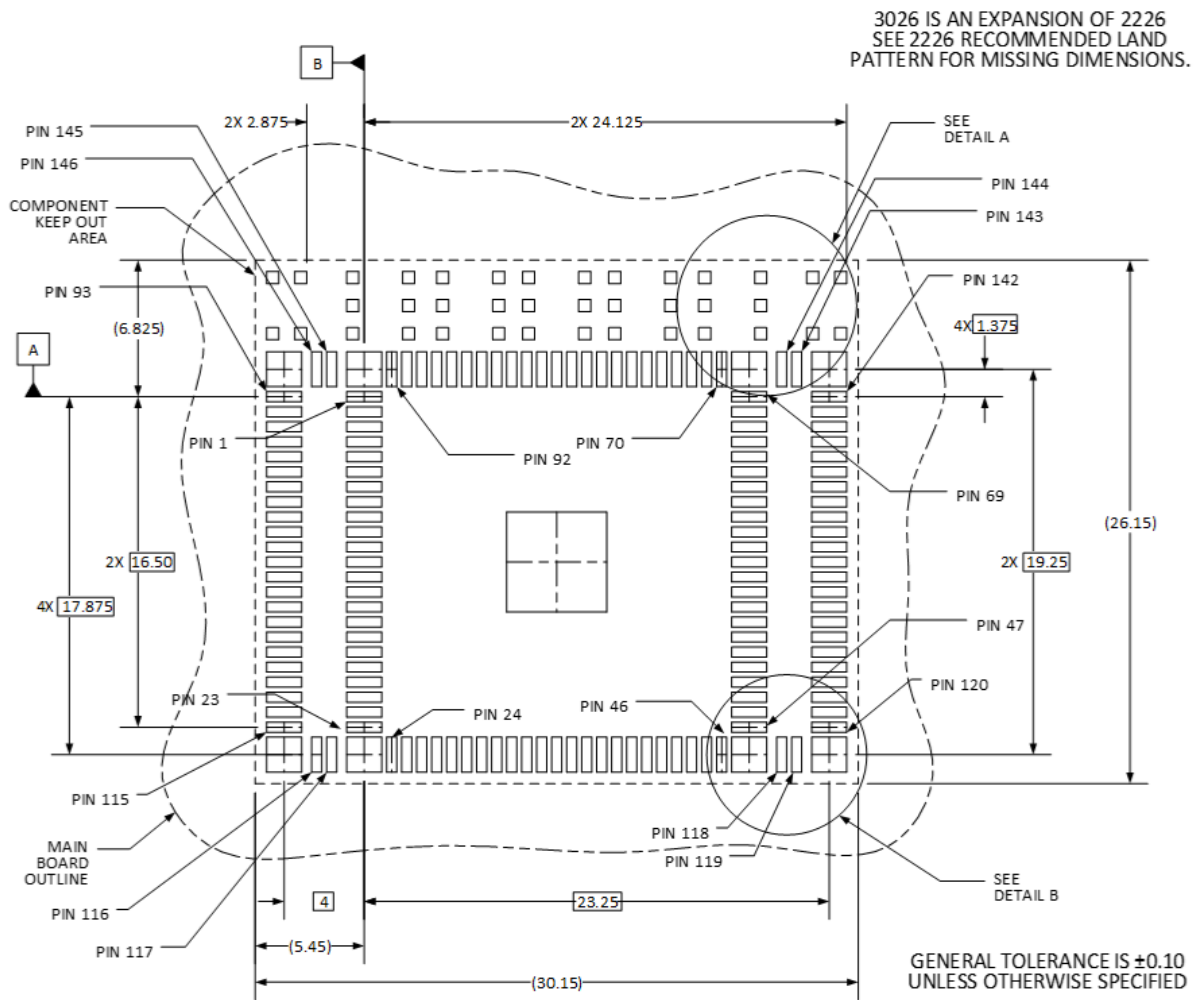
M.2 Type 3026-S3 Mechanical Outline Drawing Details Example
